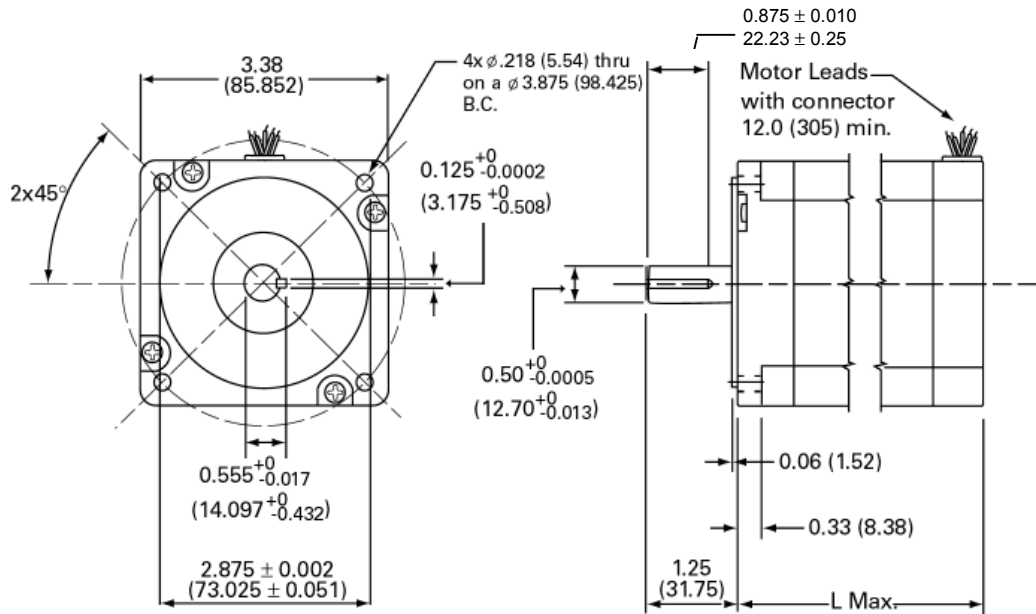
1300 Series NEMA 34 Stepping Motor Dimensions
